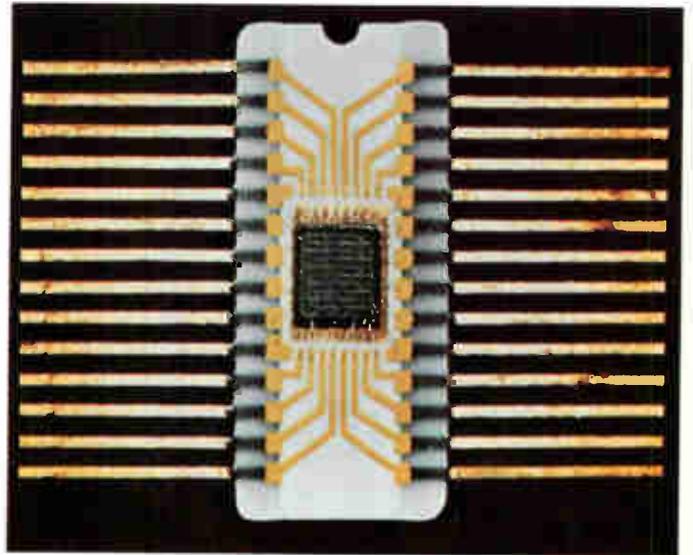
Completed Uni-Cell circuit mounted in 28-lead package ready for testing and capping.
